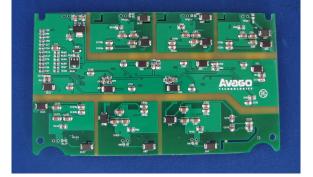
Gate drive circuit board manufactured by Avago Technologies for evaluation of 6MBI600VW-065
